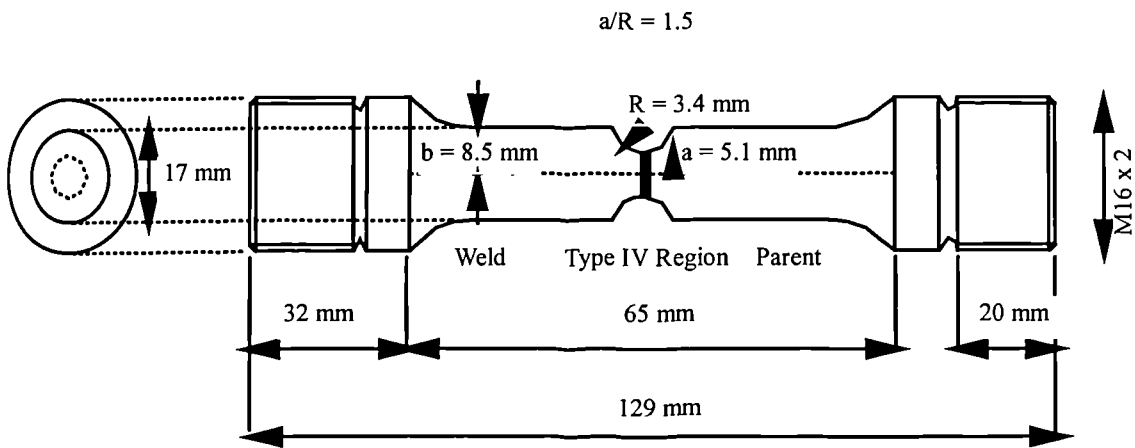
Schematic of weld specimen indicating cavity density measurement locations.
